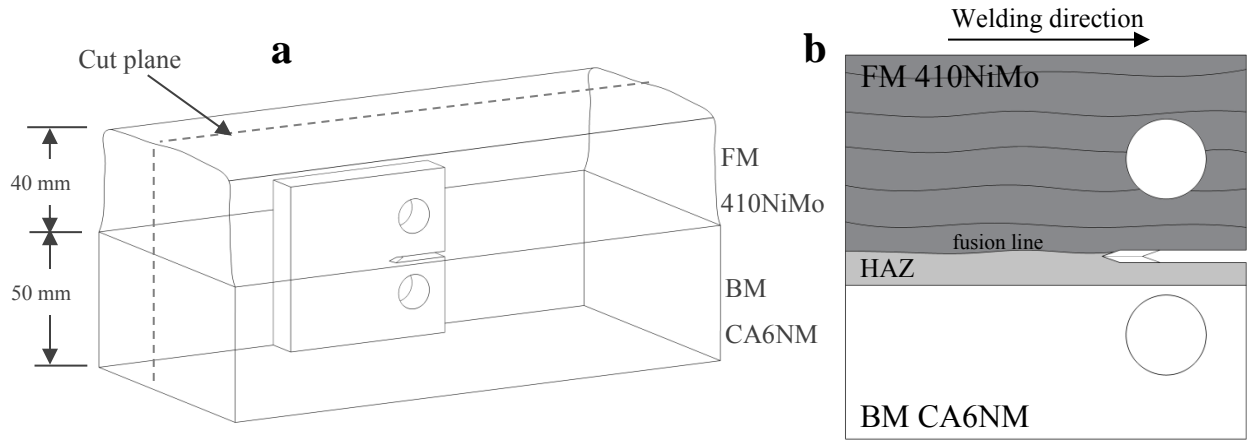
a) Fatigue specimen sampling layout from welded plates. b) Fatigue specimen showing the notch location in the HAZ.
